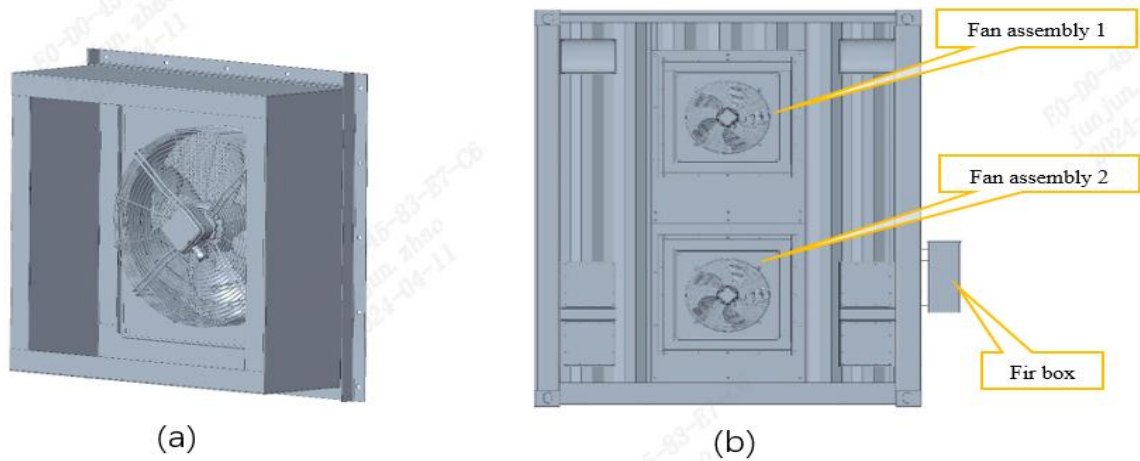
(a) Schematic diagram of fan assembly (b) Installation diagram of container fans
